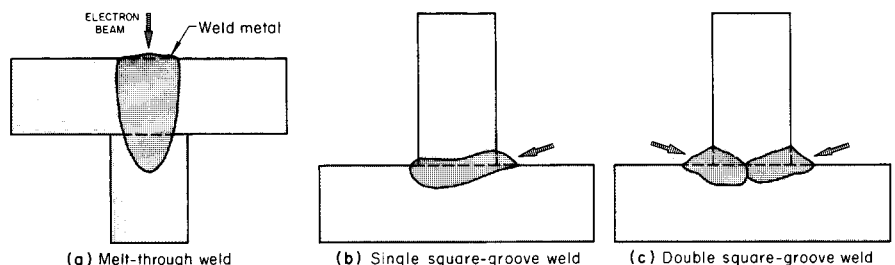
Typical welds produced by electron beam welding of T-joints
